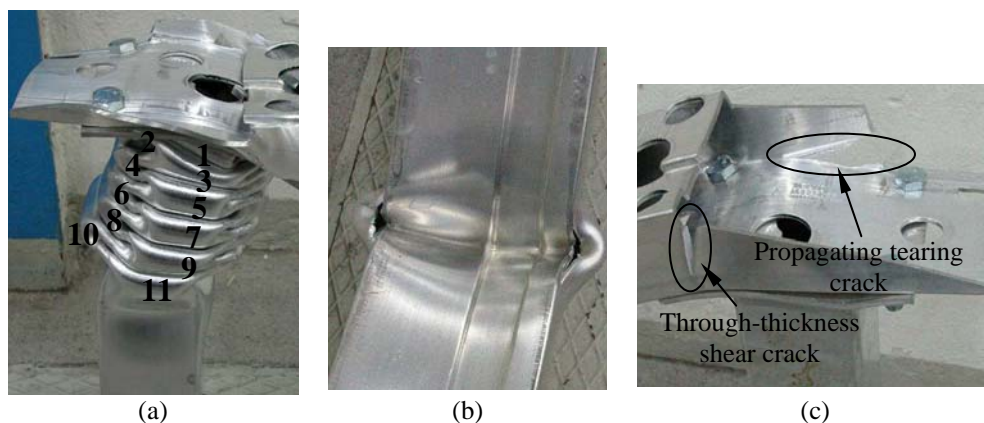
Typical deformation and failure modes for test series D: (a) Crushing failure, (b) Bending failure and (c) Through-thickness shear and propagating tearing cracks.
